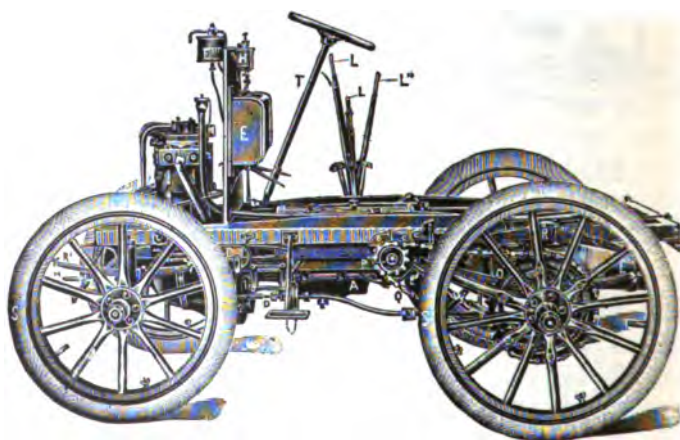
Side Elevation of the Panhard-Levassor Six-horse-power Carriage. A, the transmission gear case; E, the gasoline tank; H, oil pump; L, lever for throwing out clutch; L', reversing lever; L'', change-speed lever; M, starting crank; O, rear wheel sprocket; P''', sprocket pinion on jack shaft; Q, driving chain; S, rear wheel; S', forward wheel; T, the steering wheel and pillar; R, rear spring; R', forward spring; 1, male cone; 2, female cone.
